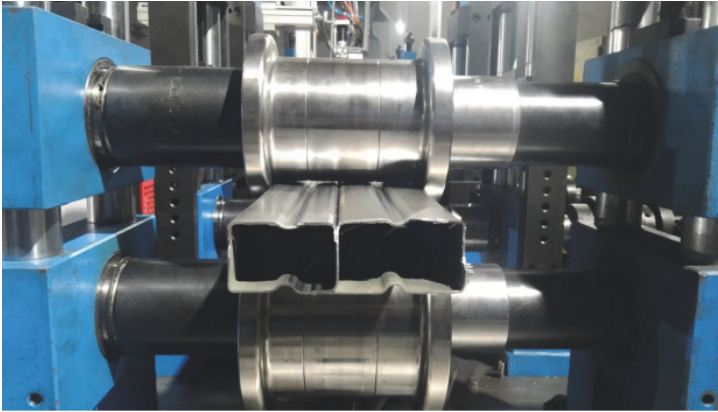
Cross-sectional shape of the part at the end of actual roll forming
